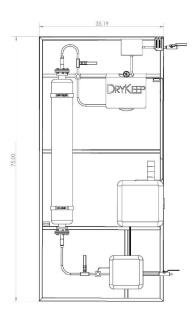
RT-3 dimension drawing (SMART cabinet shown, but not included)
